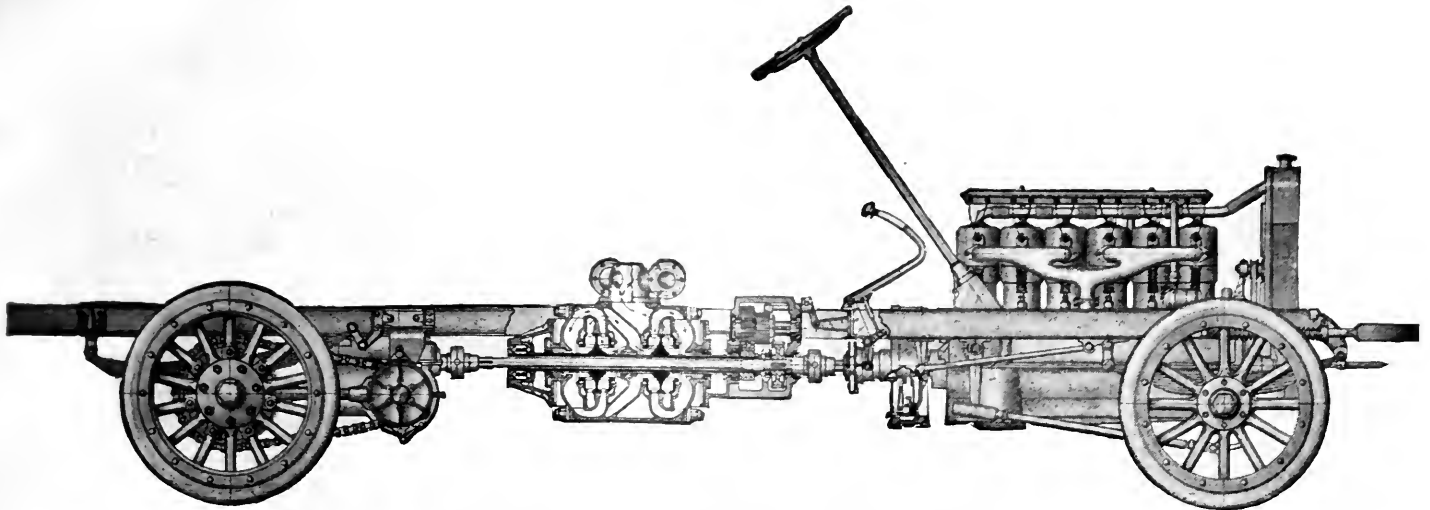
SIDE VIEW OF CENTRIFUGAL PUMP CHASSIS
